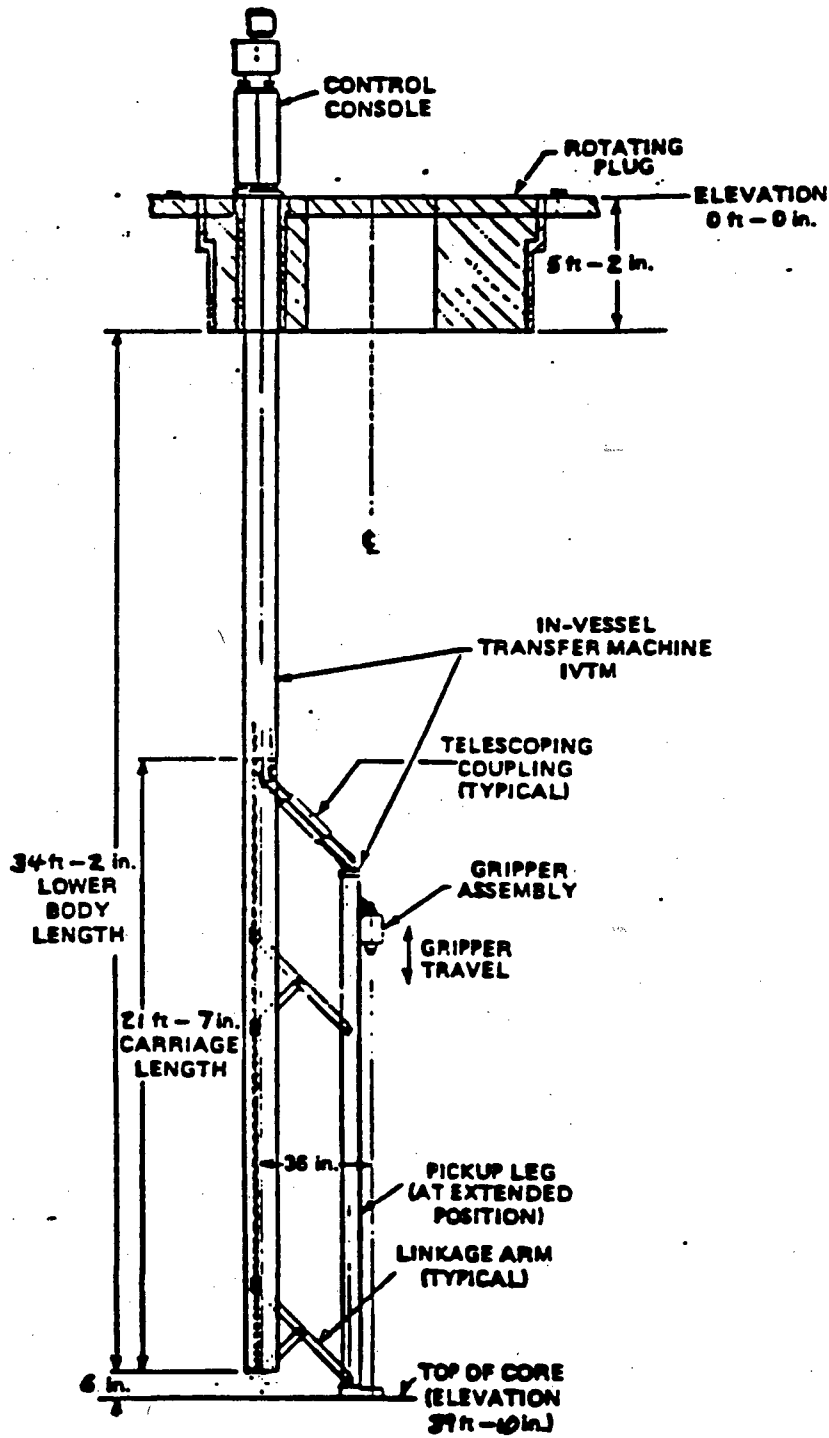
IN-VESSEL TRANSFER MACHINE
